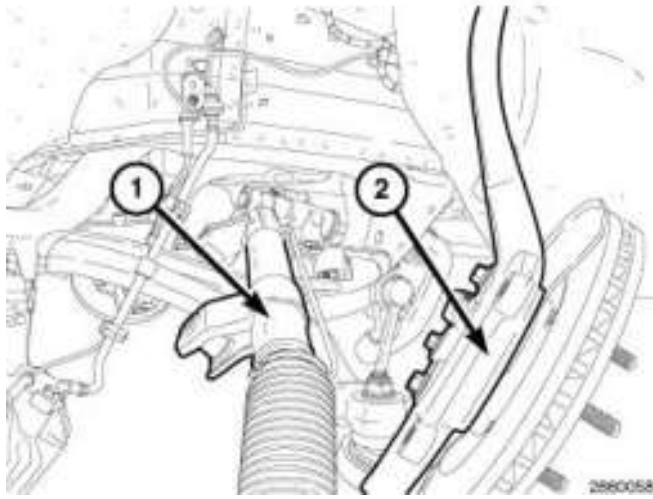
Steering Gear & Knuckle/Rotor Assembly
